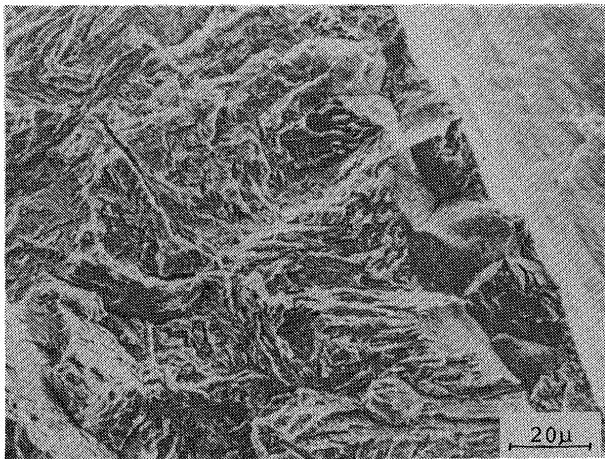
Root cracked surface near the notch occurred with Implant cracking test. material; HT80, electrode; E11016 (hydrogen; 2 cc/100 g), applied stress; 70 kg/mm² heat-input; 17,000 J/cm, non-preheating
